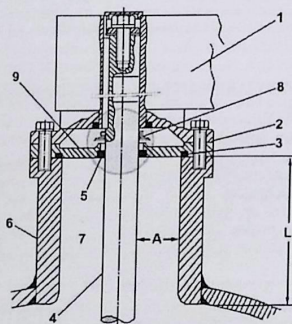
The top entering agitator with motor (1) is mounted to a vessel using a flanged or hygienic clamp connection (2), with hygienic O-rings or gaskets (3) to seal between the mating surfaces. A retained gasket having limited compression is more hygienic than an O-ring in the face for sealing the joint. The agitator shaft (4) passes through the mounting flange via a seal (5). The upstand (6) for the top mounting of the agitator should have limited length L because of the difficulty of cleaning the annular space (7) in-place. The annular space between the agitator shaft (4) and agitator nozzle (6) shall, for cleaning purposes, have the target maximum L/A ratio of 2:1. Agitator motors (1) should be equipped with permanently lubricated bearings. Where lubrication is required, the design and construction shall be such that lubrication cannot leak, drip, or be forced into the product zone. Self-lubricating agitator shaft (packing) seals (8) shall be provided with convenient means for adjustment to prevent leakage and to allow for complete drainage to the exterior. In that way, accumulations of foreign material in the event that leakage does occur can be avoided. Further, a drip protection plate (9) can be provided to prevent lubricant from entering the product zone (CFCRA, 1997; BISSC, 2003; ASME, 2009).
